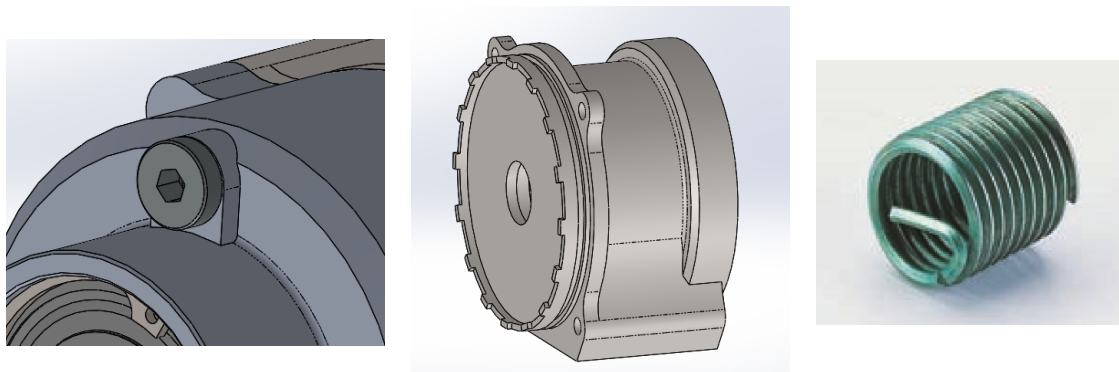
some details of the damper housing; from left to right: oil plug, toothing on motor case, helicoidal insert [Boellhoff]
